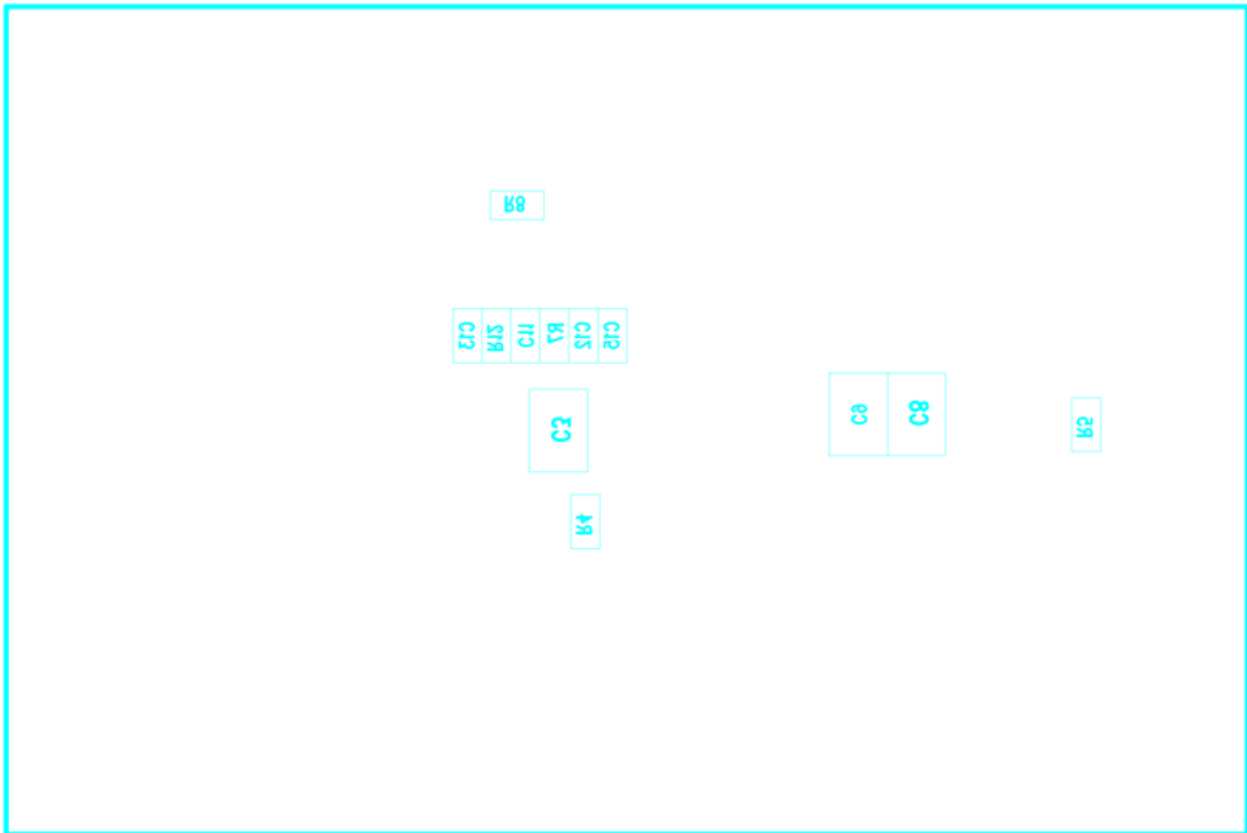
TPS54020EVM-082 Bottom Side Component Placement
